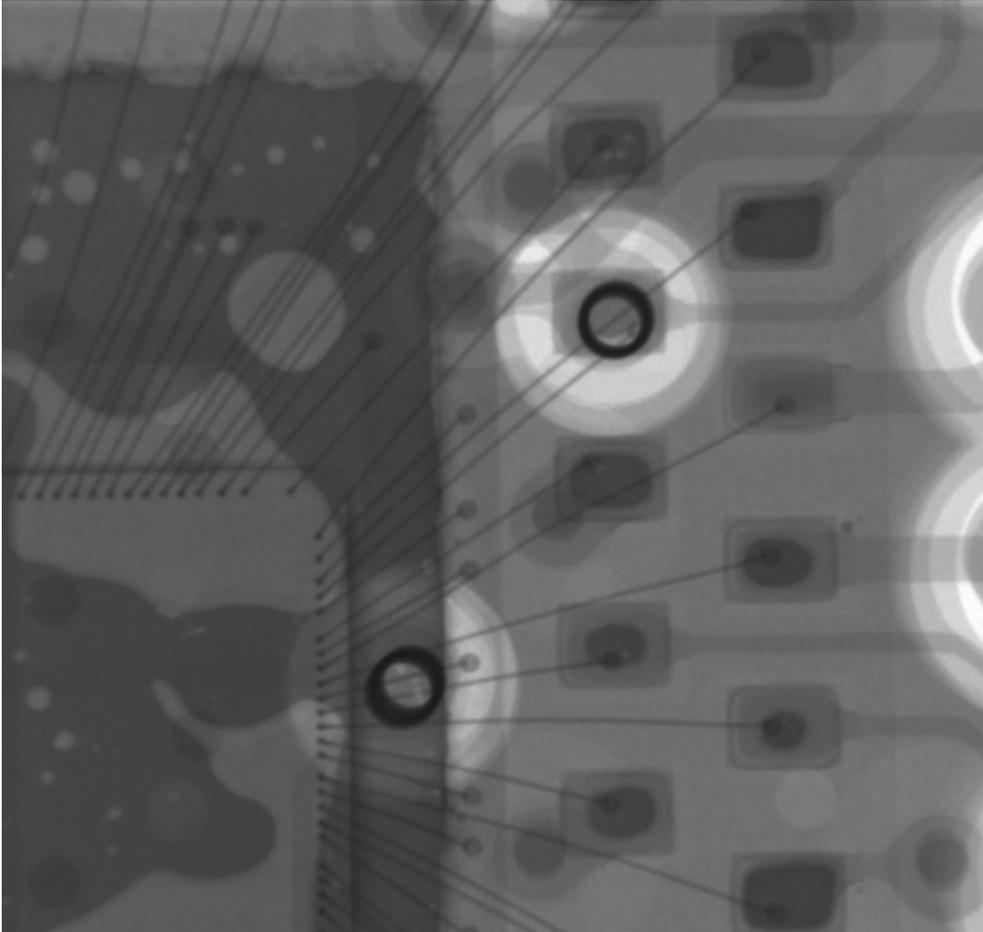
X-ray micrograph showing a dual QFN package assembly. Missing or insufficient solder paste can be clearly seen on some pads. Excessive voiding is also visible on the soldering of the exposed pad in the middle of the package.
